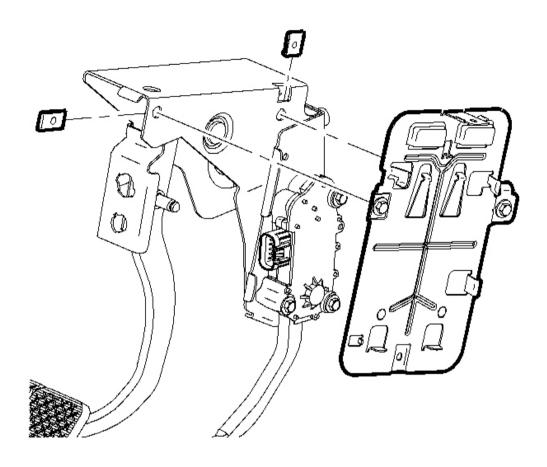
Removing/Installing OnStar J-Nuts & Mounting Bracket Bolts Courtesy of GENERAL MOTORS CORP.
